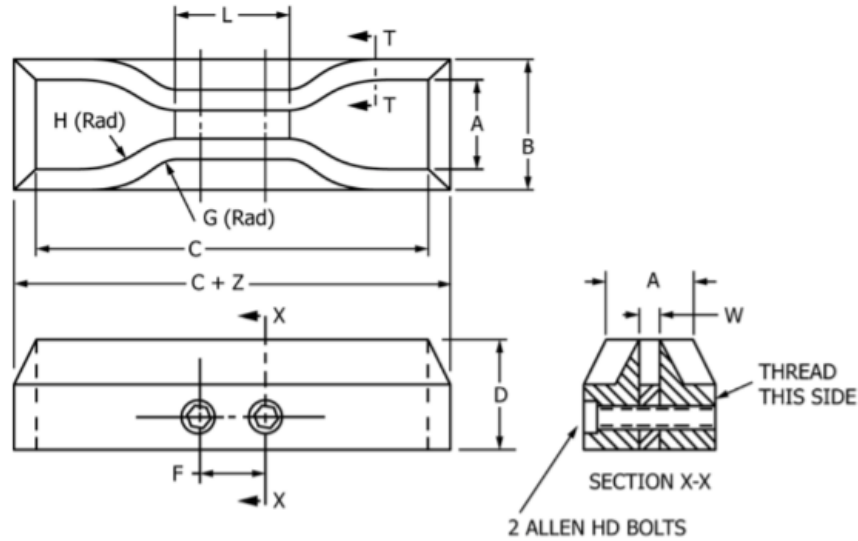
Standard Dies for Cutting Dumbbell Specimens
